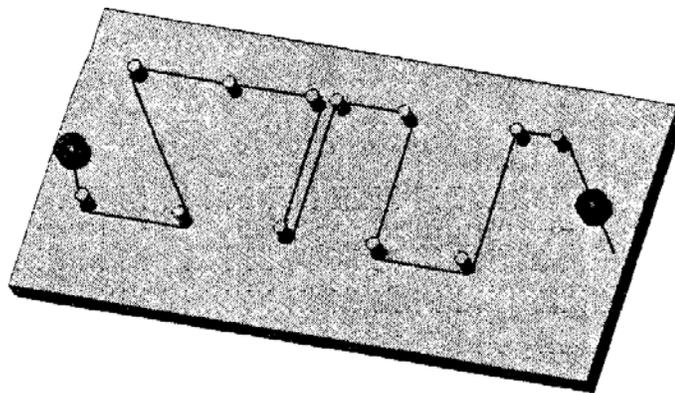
Example of a pin and plate shape-setting holding fixture [1].
